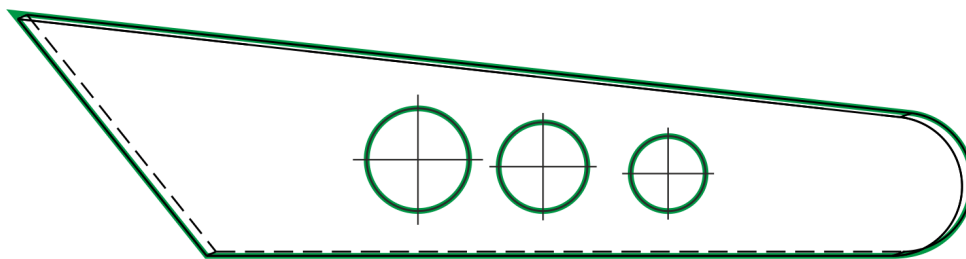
a rib example with outer shape curve for laser cutting definition
